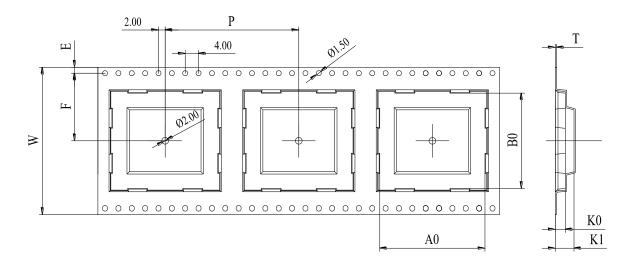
Carrier Tape Dimension Drawing (Unit: mm)
